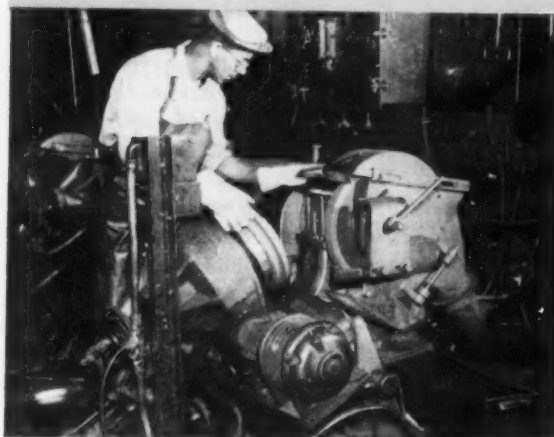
One of the semiautomatic-machines (left) that grind the chilled fins from brake drum castings. Work pieces rotate slowly as they advance into grinding wheels. One man tends two machines.
